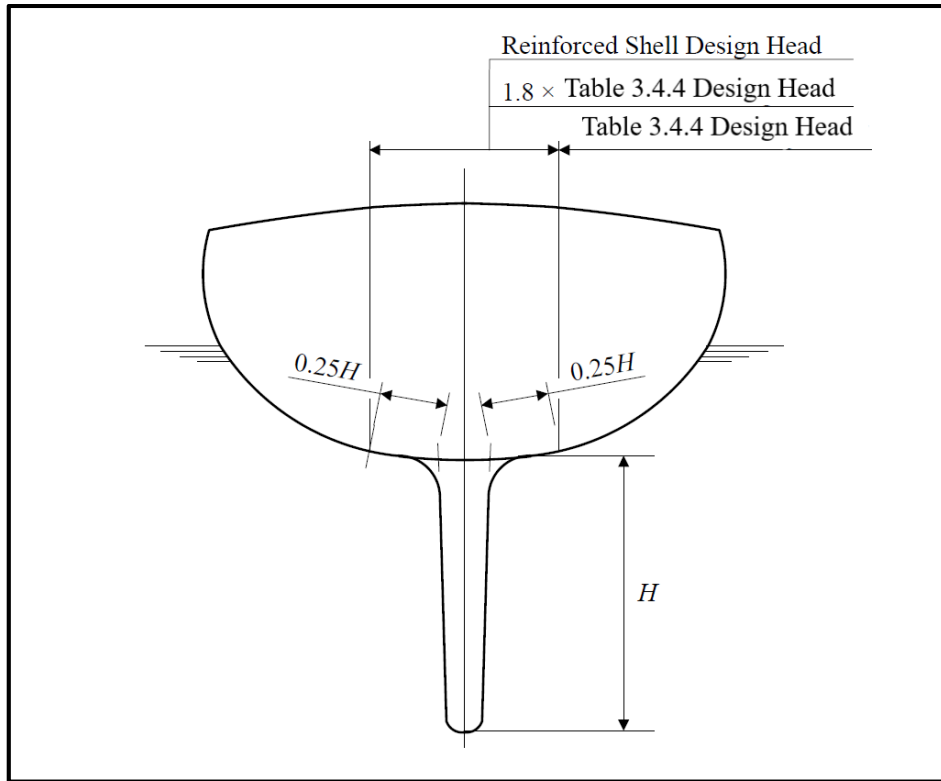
5 Sailing Yacht Pressures – Transverse Section (ABS)
